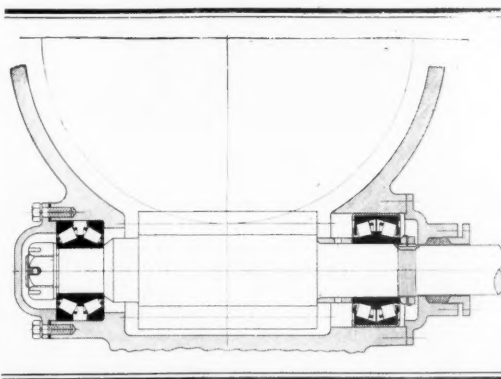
Bearing Mounting for Worm Gear Shaft, Showing Provision for Shaft Expansion
